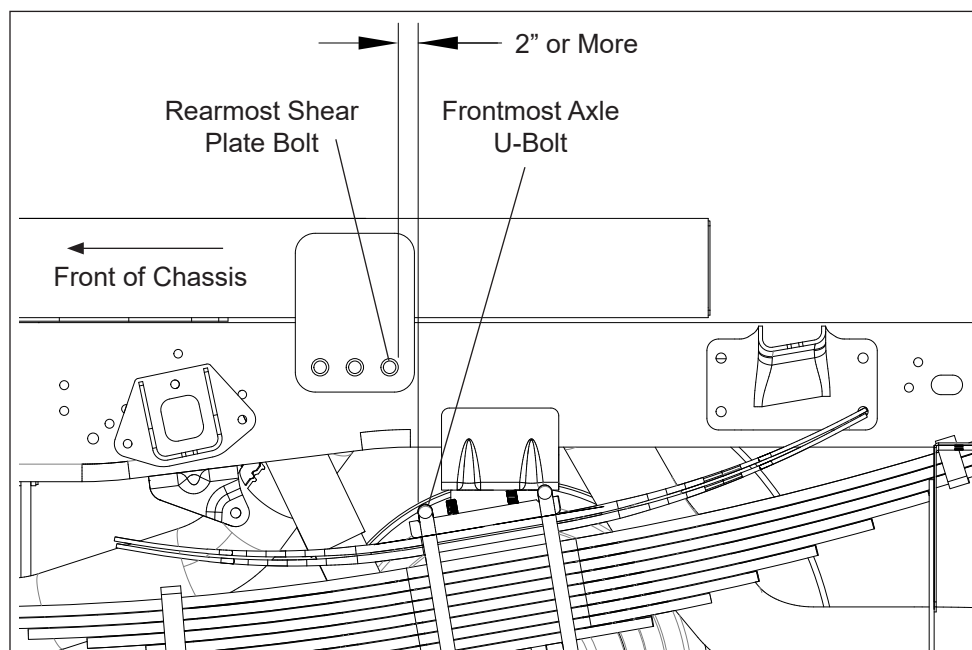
Shear Plate Bolts Located in Front of Axle U-Bolt
